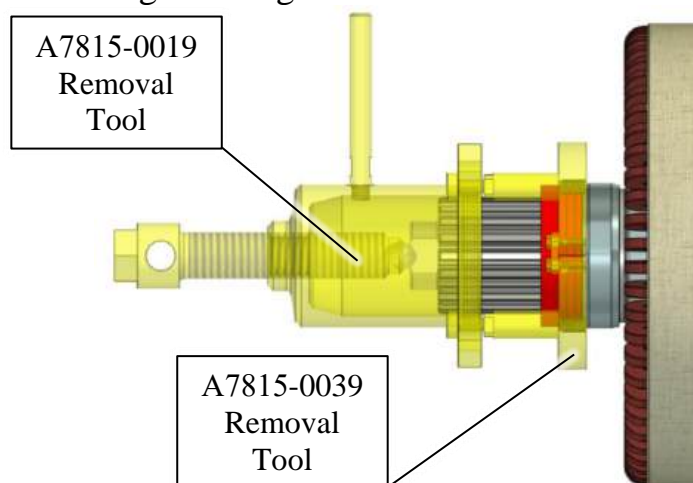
Removing Ring of EDP-600 and EDP-600S Electric Motor
